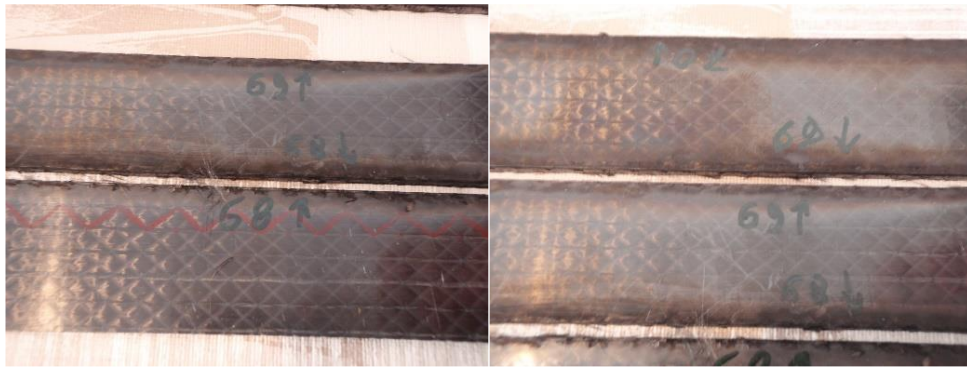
Images of top side laser cut surfaces of tests 68 (left) and 69 (right).
